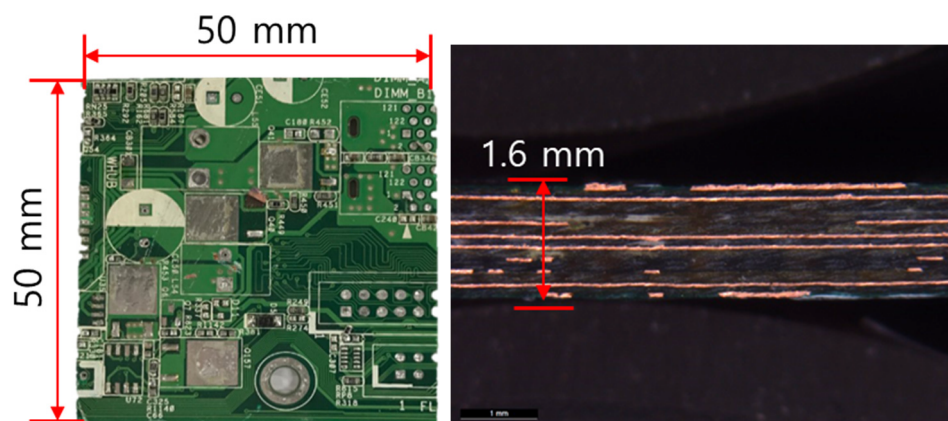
Front and side images of waste shredded PCB with EC disassembled for copper separation from waste PCB.
